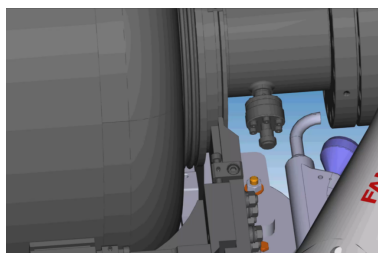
3D model of a cleaning extension, cleaning flange holes in preparation for assembly.
